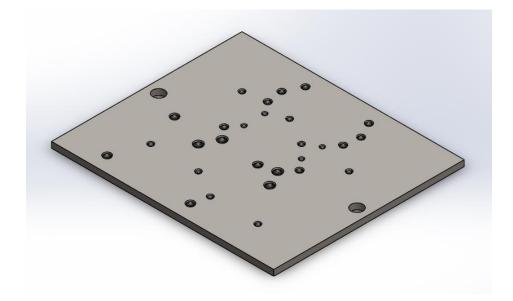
SMALL ELECTRIC UNITS MOUNTING PLATE
